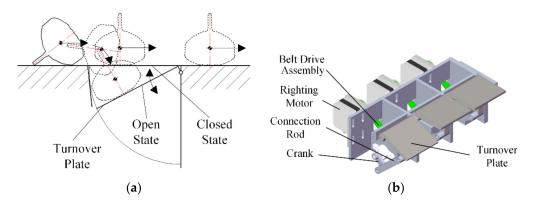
Righting mechanism. (a) Principal diagram of the righting mechanism; (b) 3D view of the righting mechanism.
